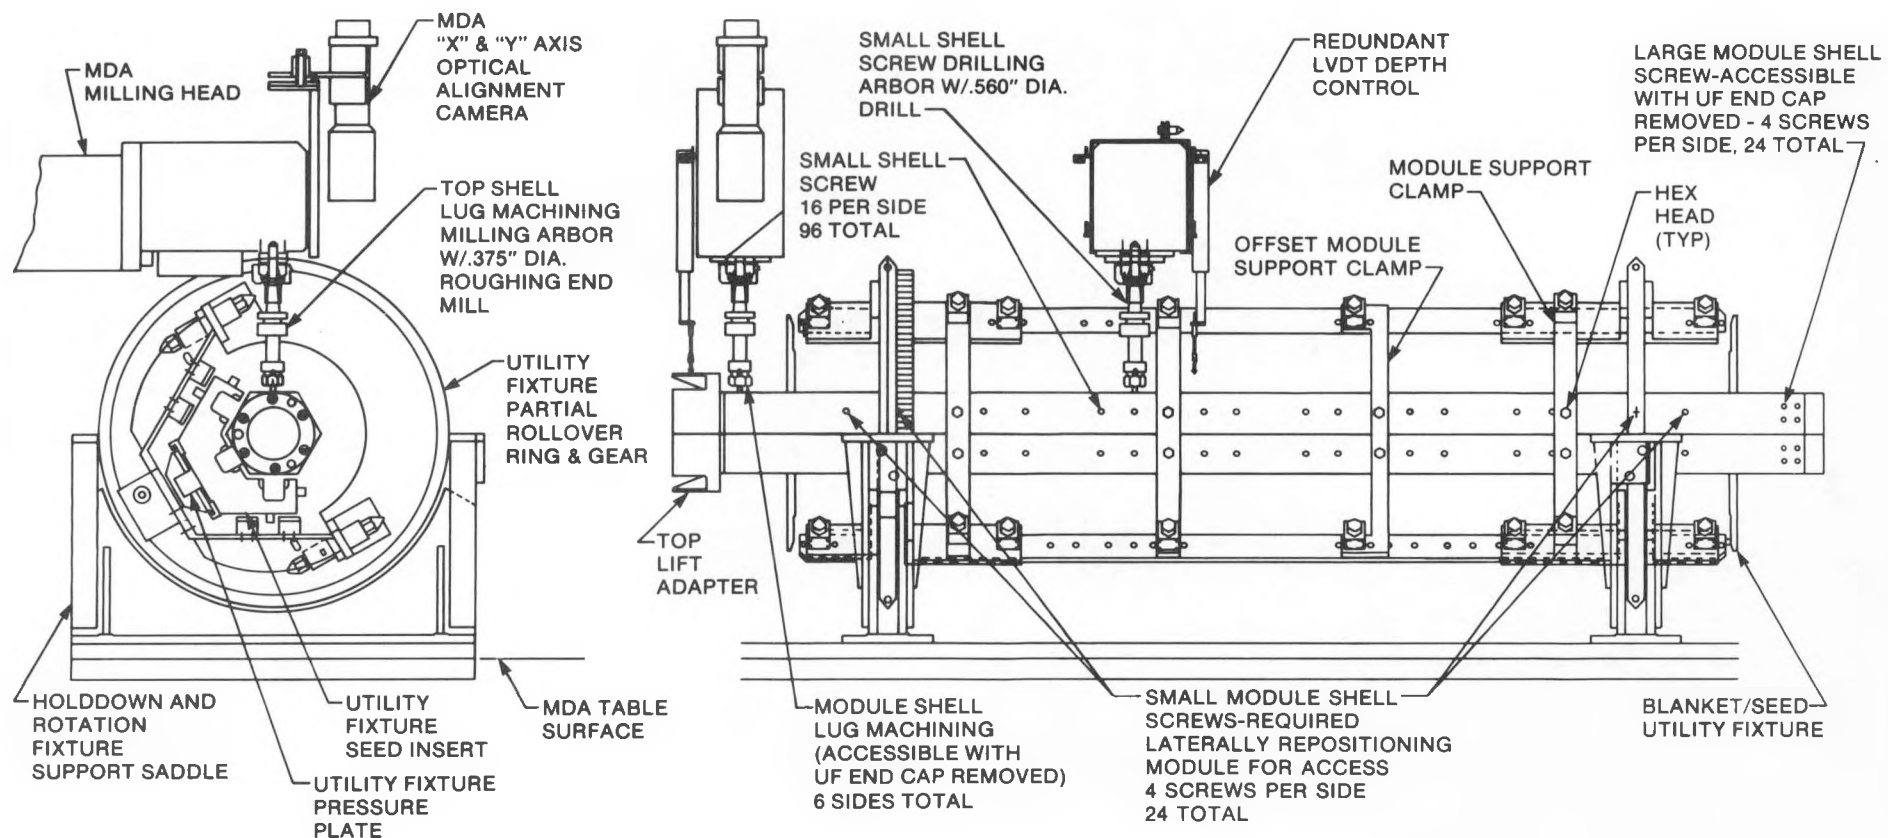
LWBR Seed II-3 Shell Screw Removal and Lug Machining
